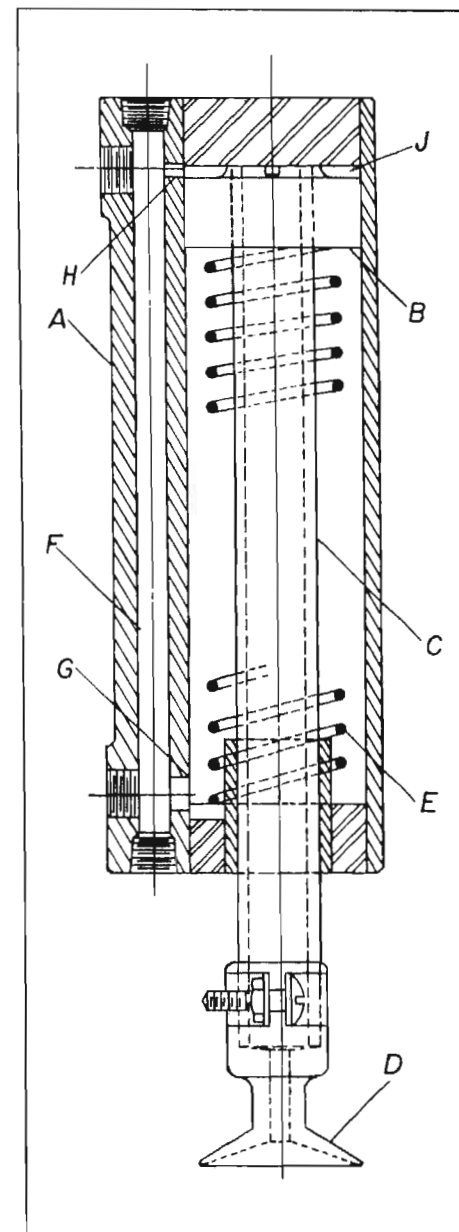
Vacuum lifter grabs sheet on contact, and will handle the whole of a big stack.
